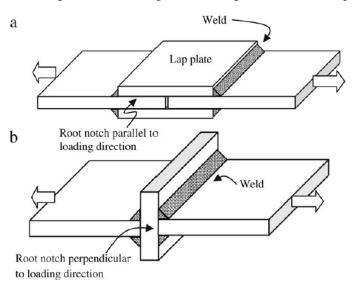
Transverse welds in (a) Lap-welded specimens and (b) Cruciform type specimens.
